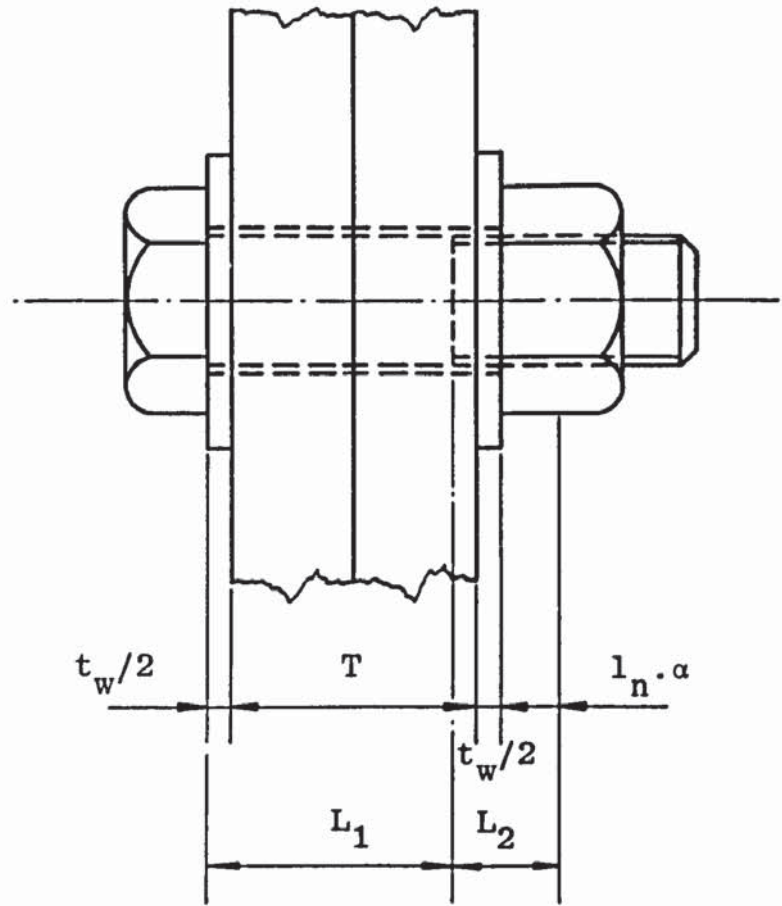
GENERAL BOLT DIMENSIONS
